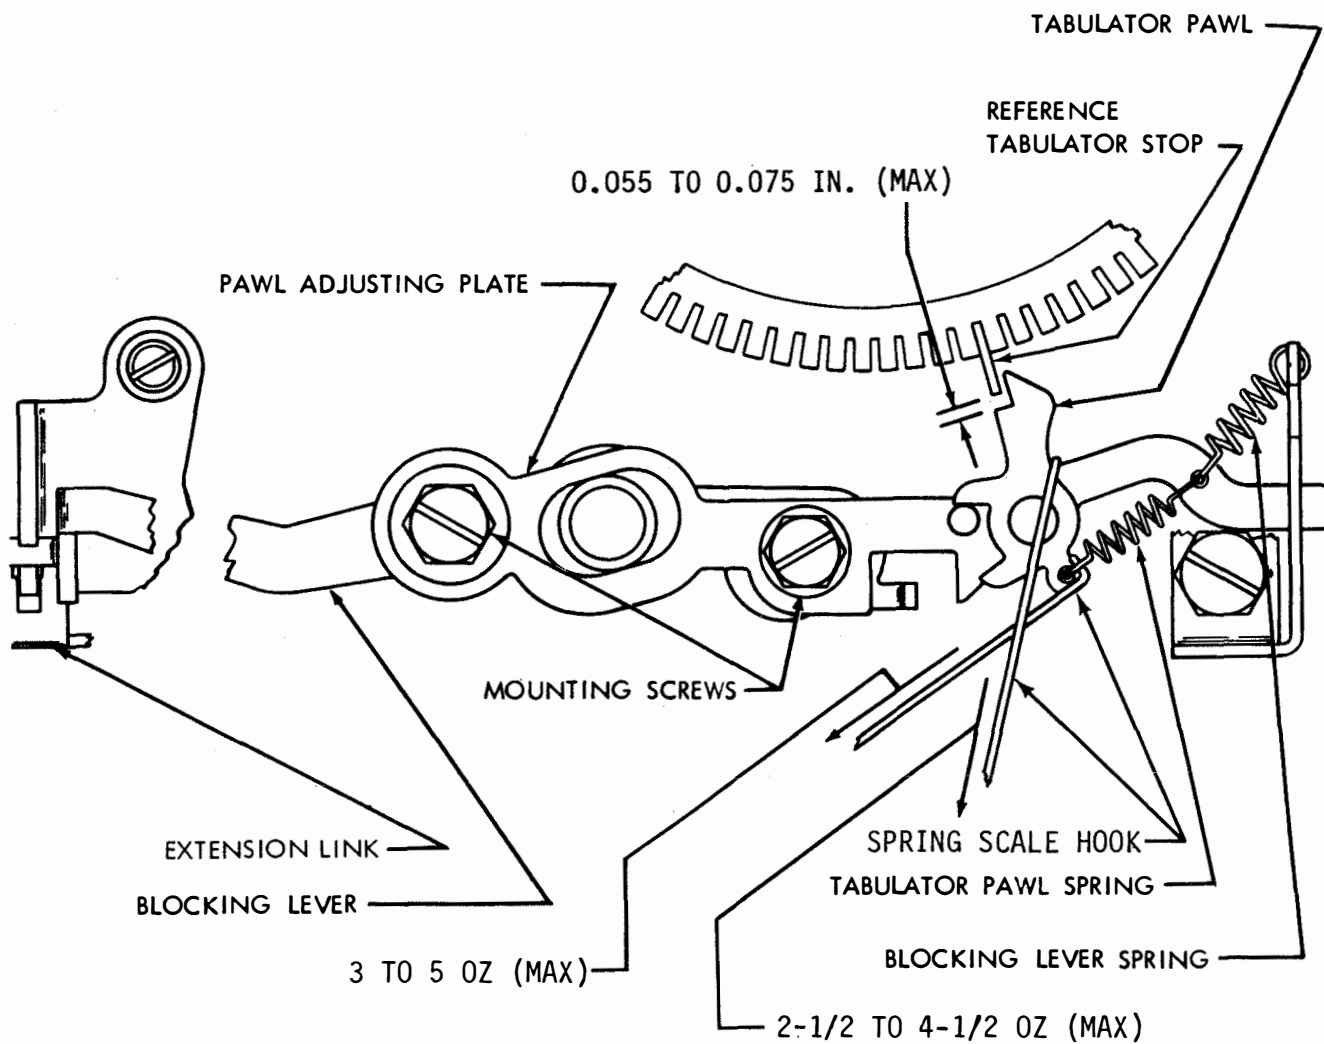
Blocking Lever Return Spring, Tabulator Pawl-Vertical (Final), and Tabulator Pawl Spring, Front View
